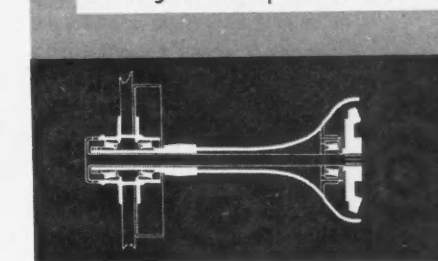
Wheel is mounted on outside of housing on two bearings in full-floating axles. The axle shaft serves only to turn the wheel
